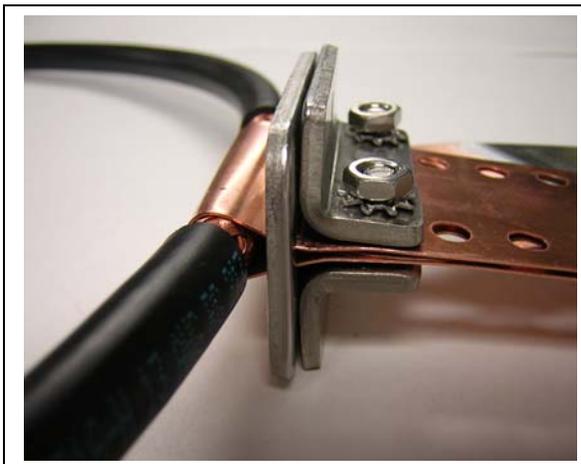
A & B: Grounding clamp assembly ready to be tightened.
